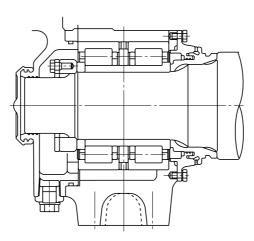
Double-Row Cylindrical Roller Bearing with Rib to Sustain Axial Load
